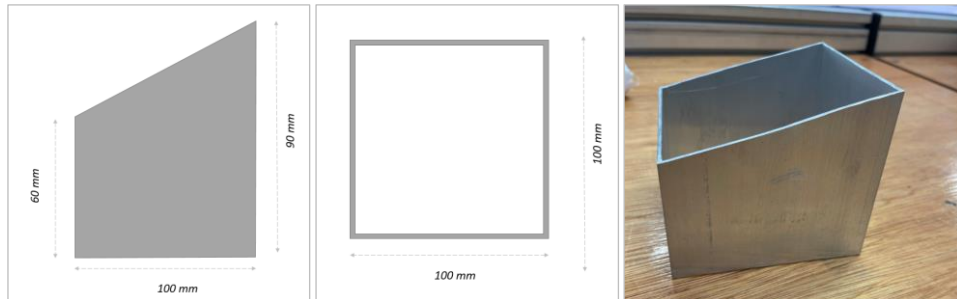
Dimensions of aluminium DUT (Side and top view). Picture of aluminium DUT
